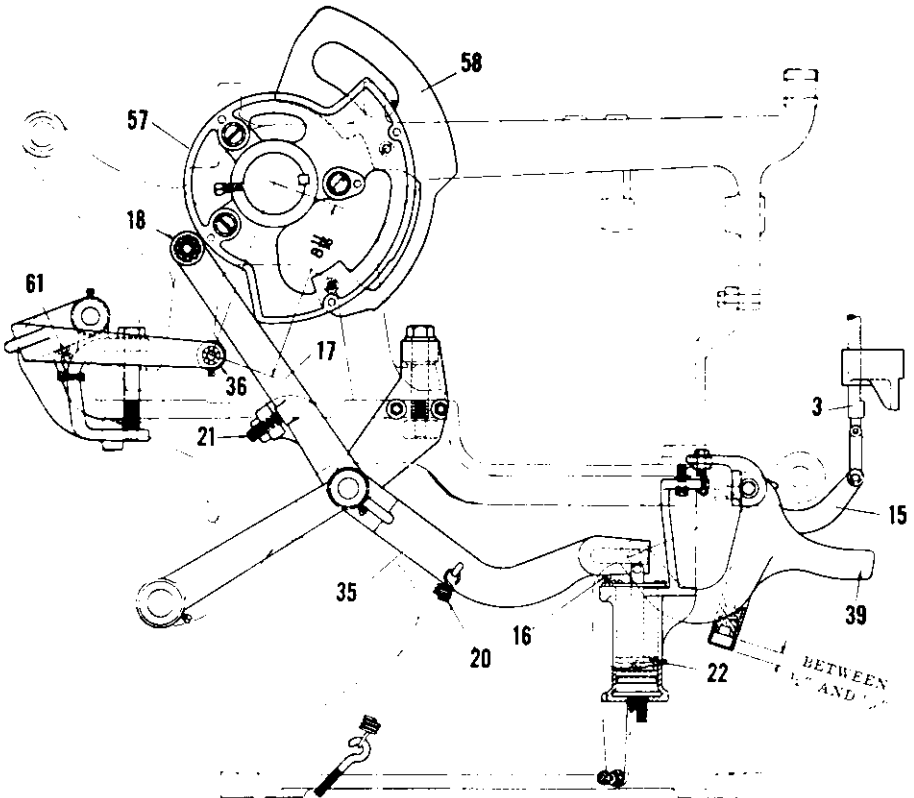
Left-hand side view of the Self-Quadder mechanism.
